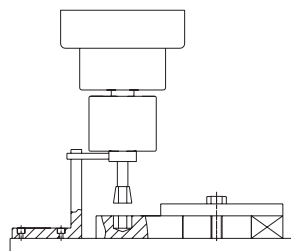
Use of the auxiliary lever with a drilling or milling machine
